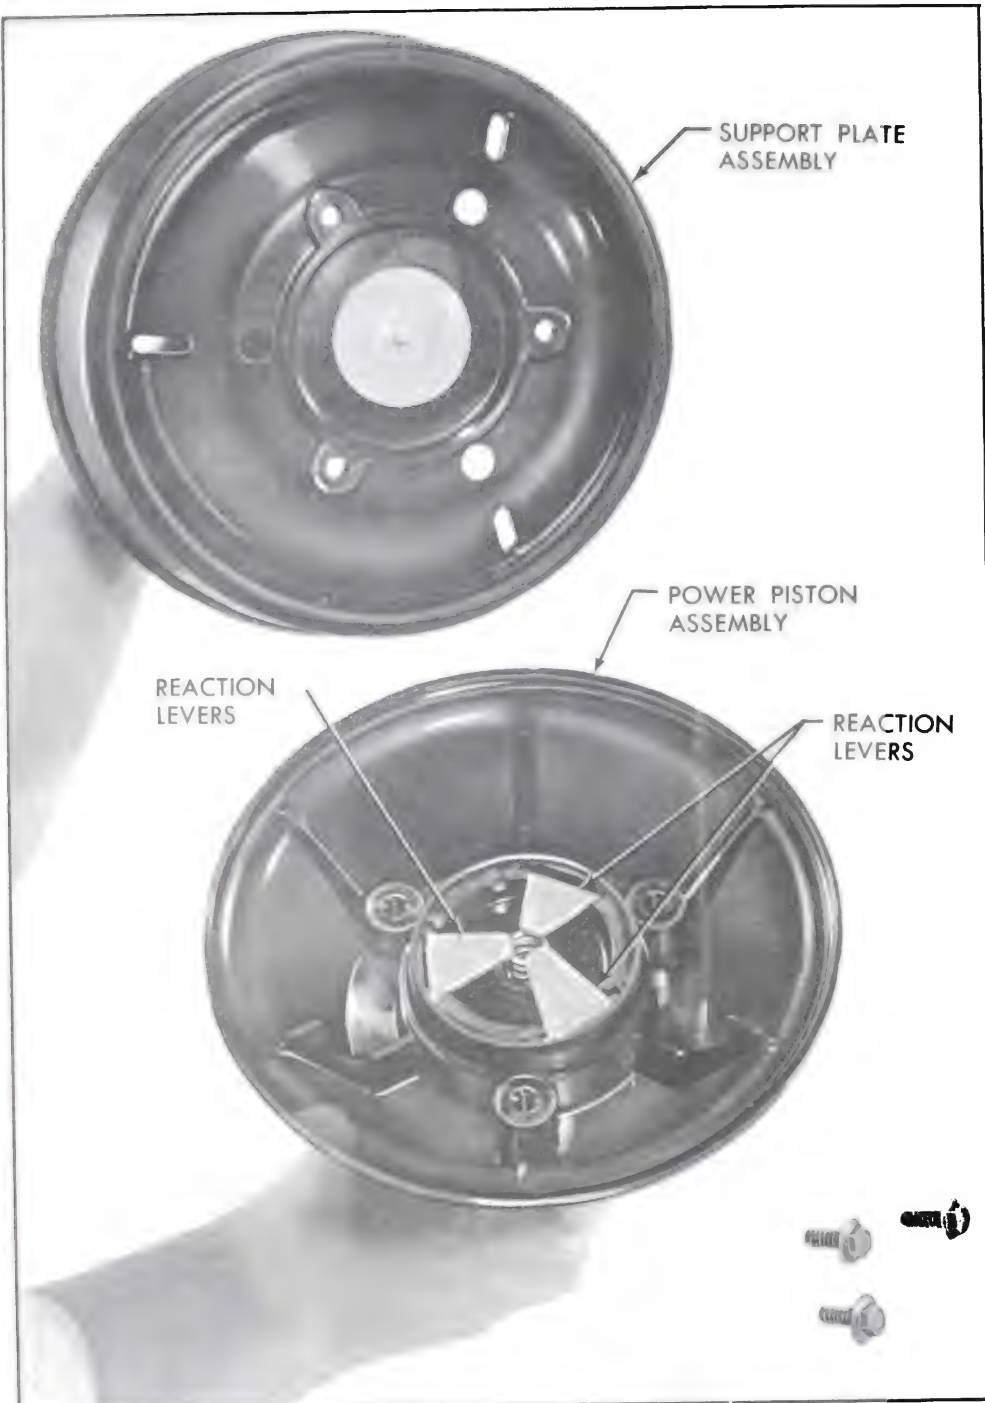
Removing Support Plate Assembly from Power Piston Assembly
